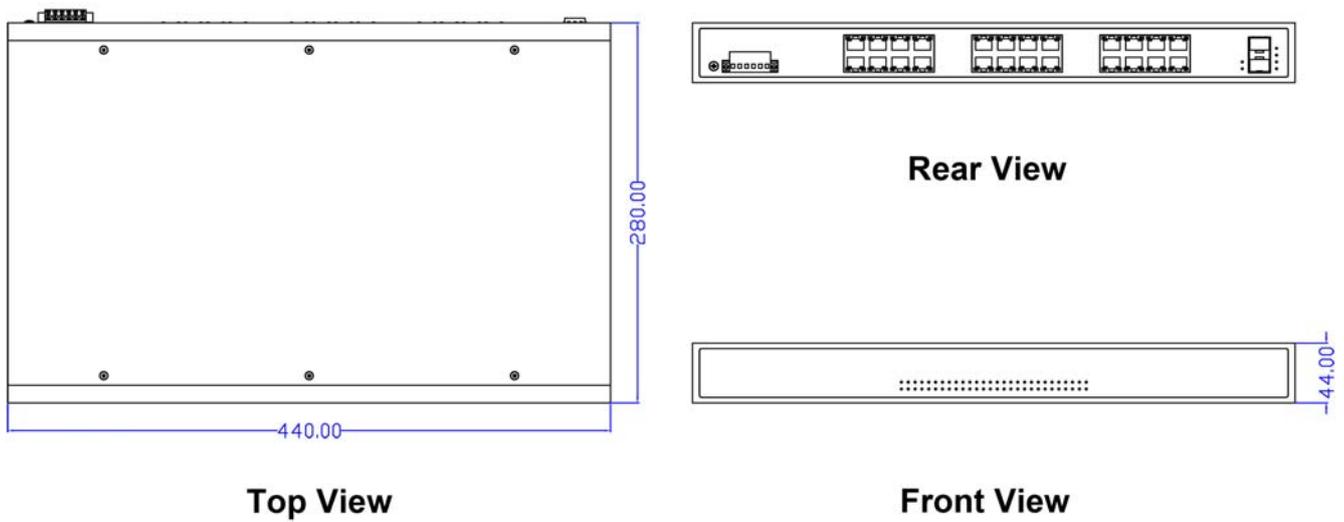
EKI-4524ARI Mechanical Dimensions
